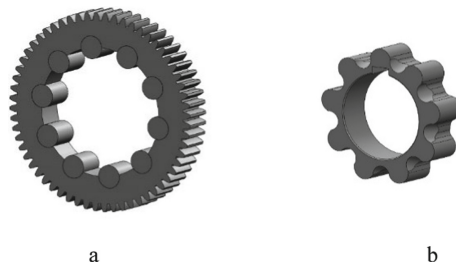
Elements of the displacement system of the orbital hydraulic motor: a – external rotor with plug-in teeth (rollers); b – inner rotor.
